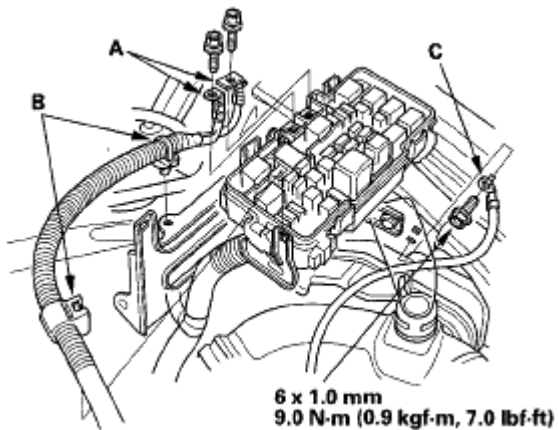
Identifying Under-Hood Fuse/Relay Box Clamps And Bolts
